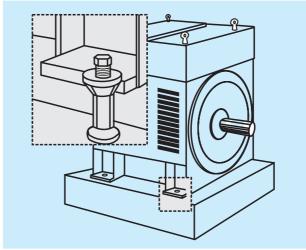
Motor mounted on a concrete base with foundation studs.
